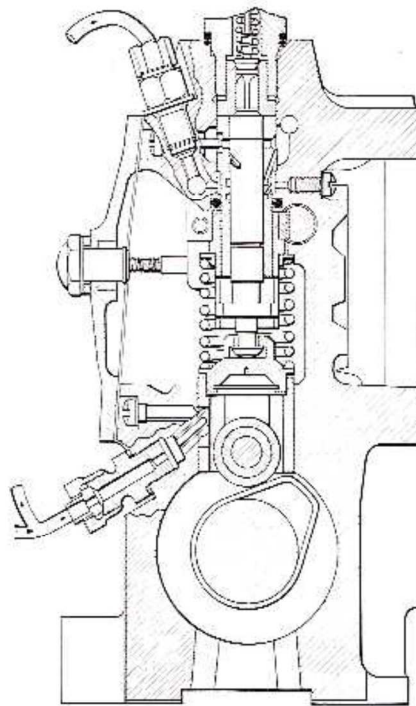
SECTION VIEW OF STAGE II TYPE PUMP
